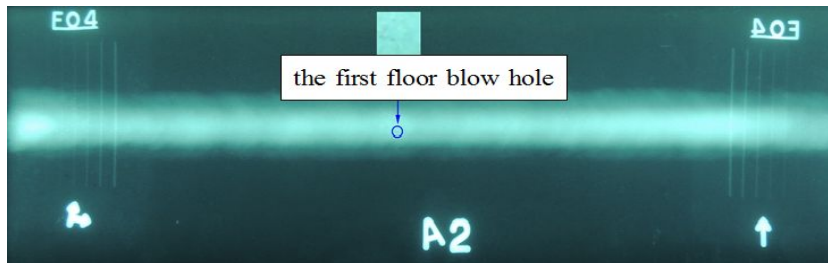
X-ray radiographic test film of shielding gas CO<sub>2</sub> 100% in preheating welding specimen
